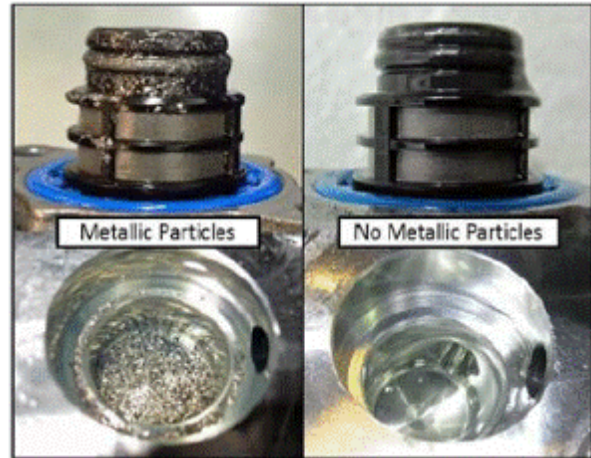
N290 fuel metering valve and valve bore shown with and without metallic particles.
